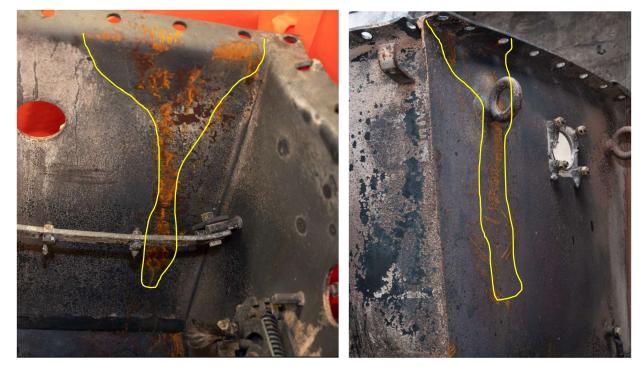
Corrosion region on inside and outside of the switch housing aligning with three bolt openings.
